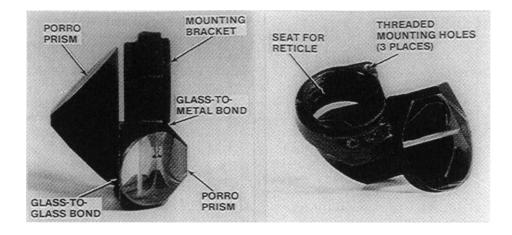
Photographs of the bonded Porro prism subassembly.
